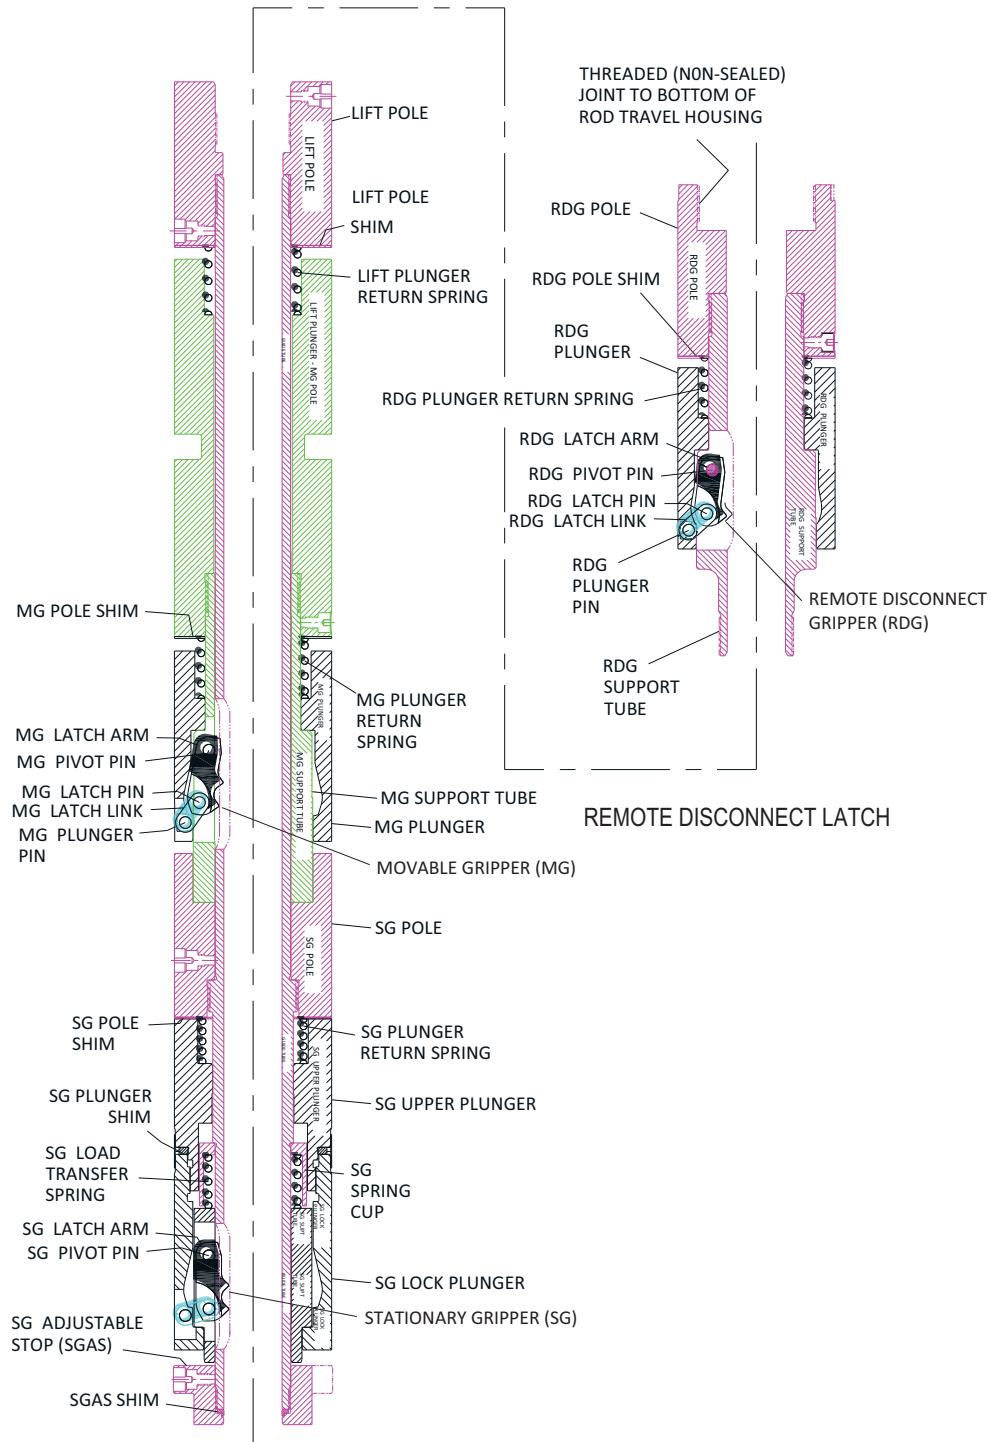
Control Rod Drive Mechanism Drive Shaft Interface with Control Rod Assembly
